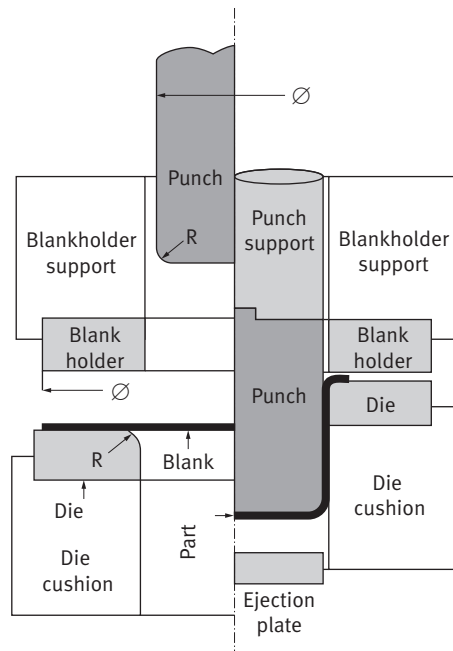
Deep drawing forming mode: the blank slips between the die and the blank-holder
